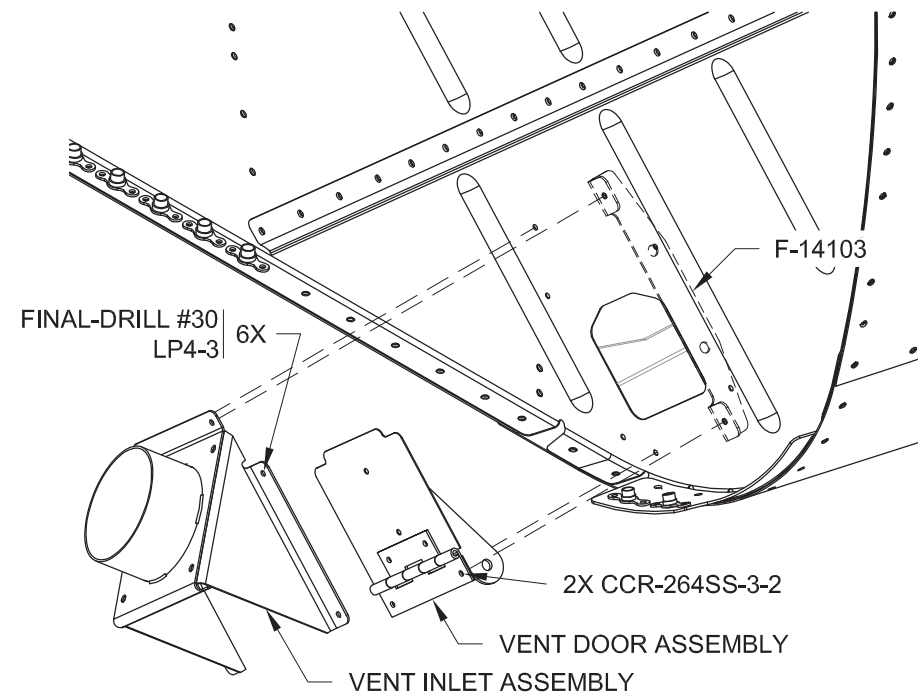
INSTALLING THE VENT DOOR & INLET ASSEMBLIES
